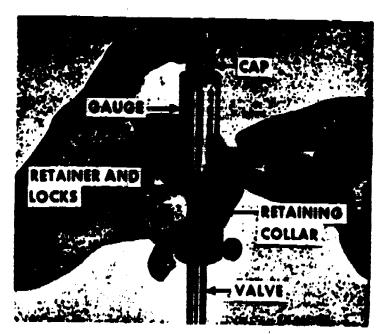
Using SE-1733 Valve Gauge for Checking Cap Clearance with Valve Removed.
